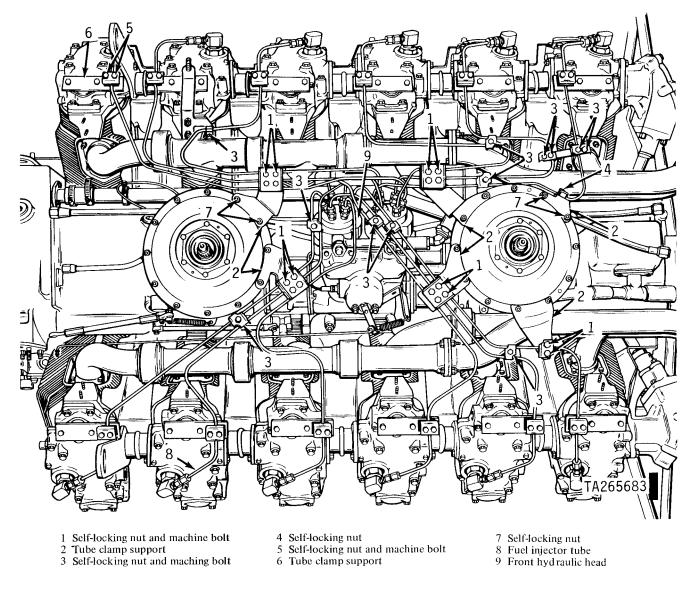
Removing or installing fuel injector tube clamps, brackets, supports and injector tubes, model AVDS-1790-2C and AVDS-1790-2D engines.
